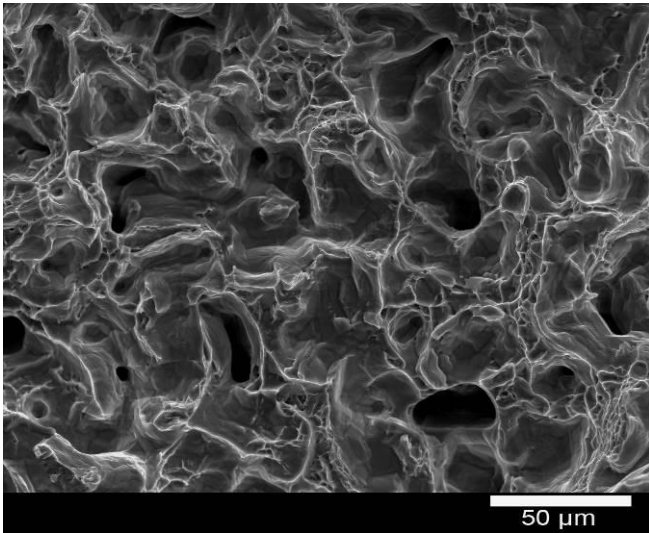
Tensile fracture surface of MIM35L samples. Pores and dimples are visible.
